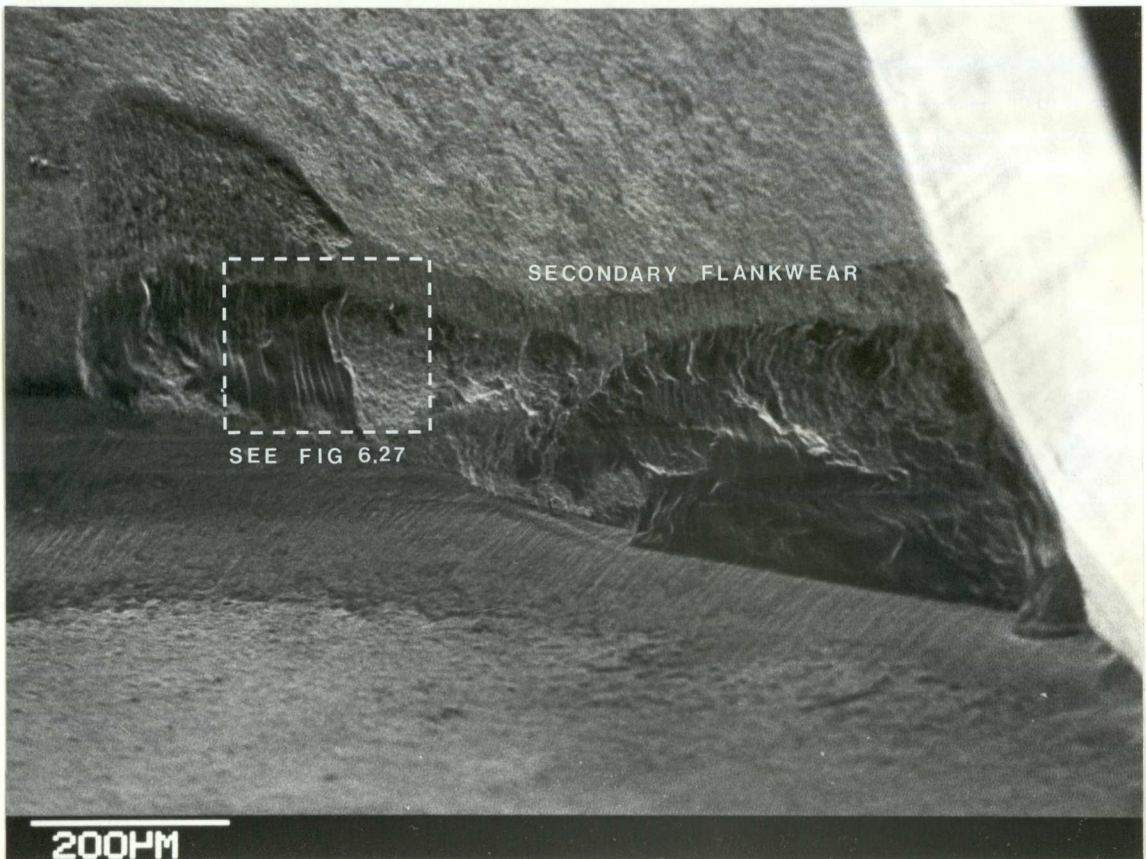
BROKEN CUTTING EDGE SHOWING
